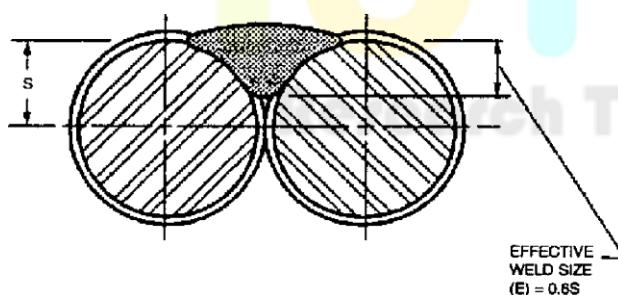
Effective weld size for flare-V-groove welds.
